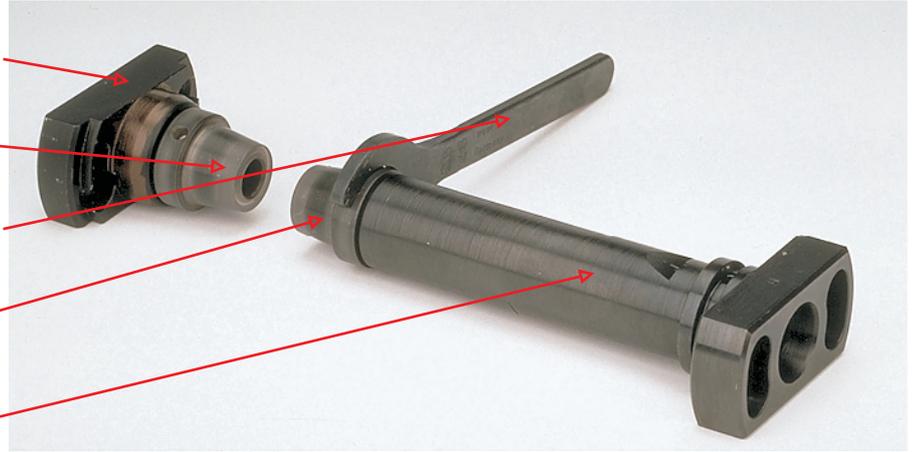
/9 Nozzle holders, nozzles and hook spanners
